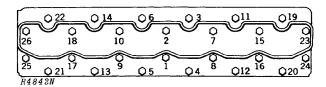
Cylinder Head Cap Screw Tightening Sequence
